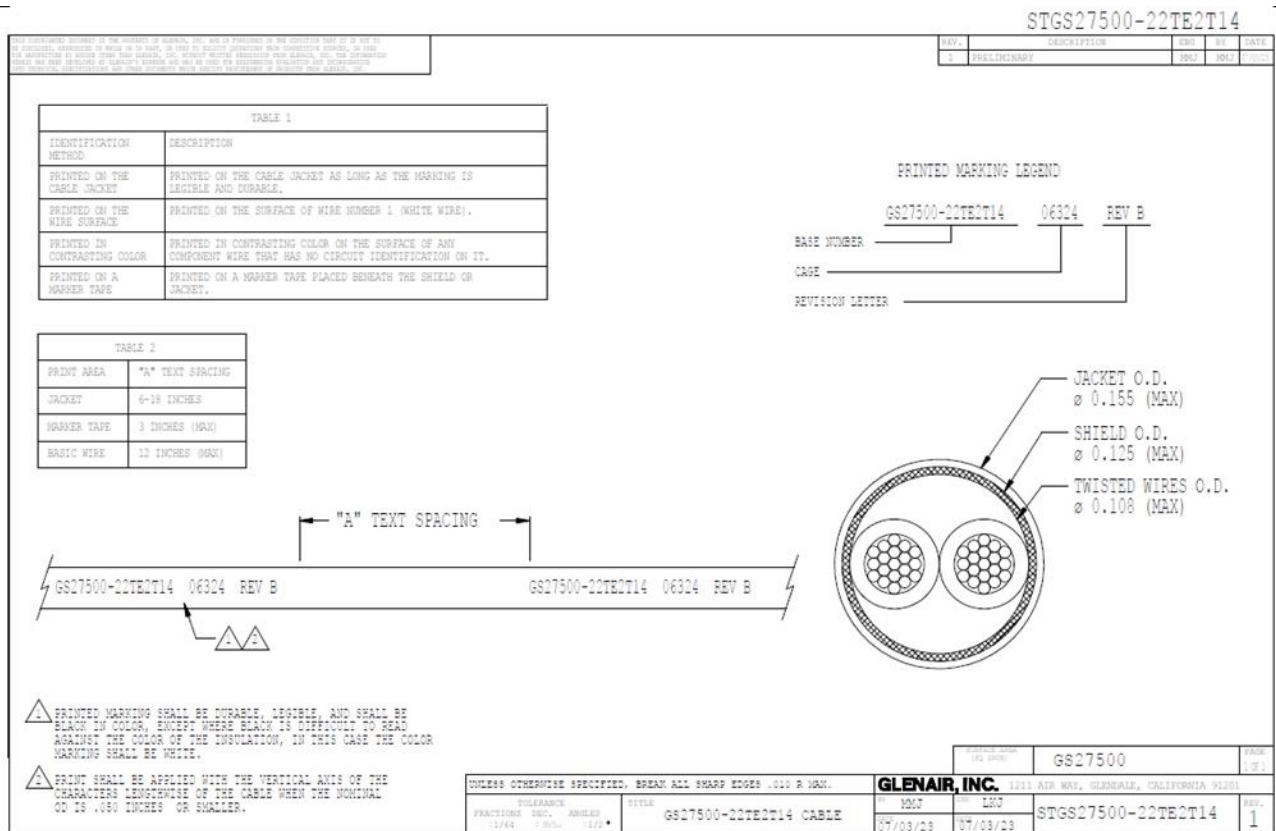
Glenair GS27500-22TE2T14 Wire Drawing
